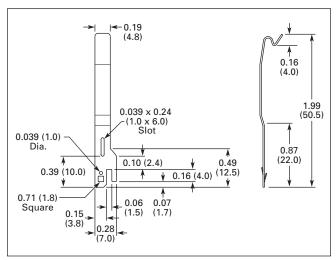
PYC-B2 Hold Down Spring — Approximate Dimensions in Inches (mm)
